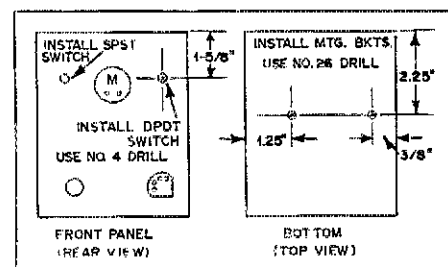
Hole-drilling template (not to scale) for mounting the spst and dpdt toggle switches on the HM-102 front panel, and for the pc-board mounting brackets on the rear panel of the wattmeter.
